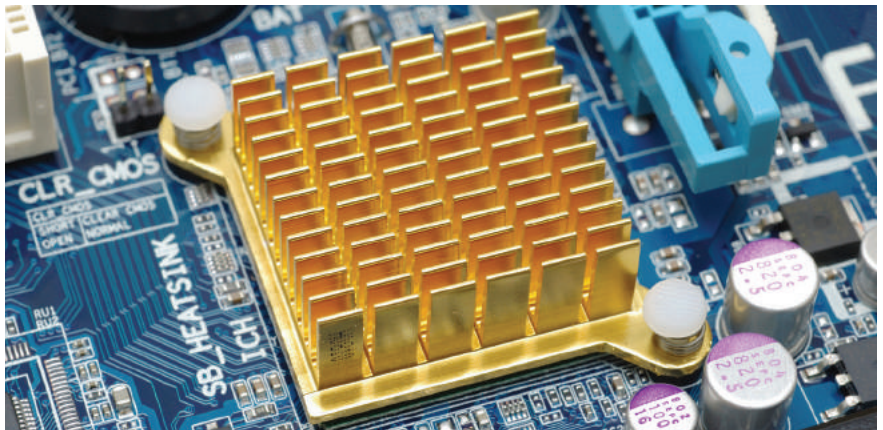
Vertical plate fin heat sink mounted on a PCB with power electronic components that drive critical continuous manufacturing operations.
